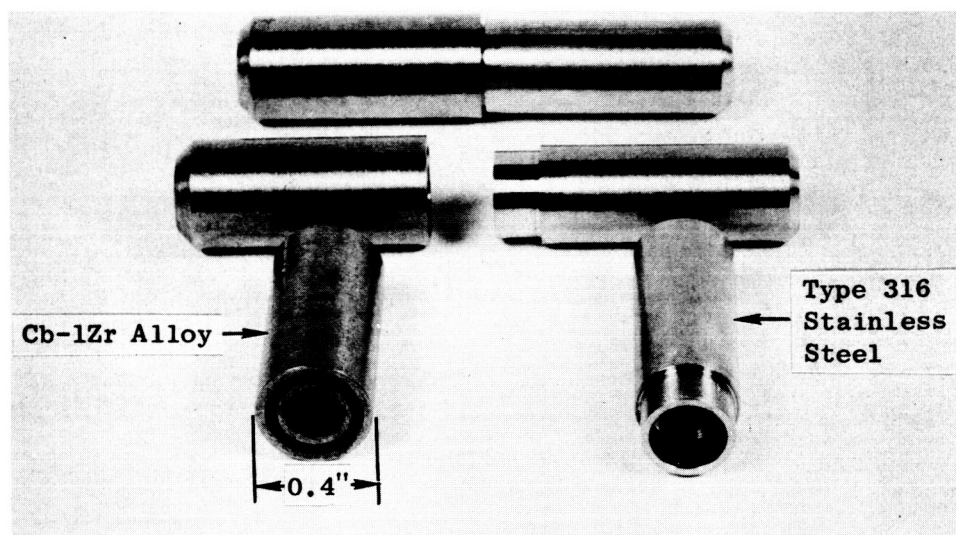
Bimetallic Joint Between Cb-1Zr Alloy and Type 316 Stainless Steel. Process Tubes, 0.375-Inch OD by 0.065-Inch Wall Thickness, are Welded to the Cb-1Zr Alloy Component Prior to Brazing. (Orig. - C64122908)
